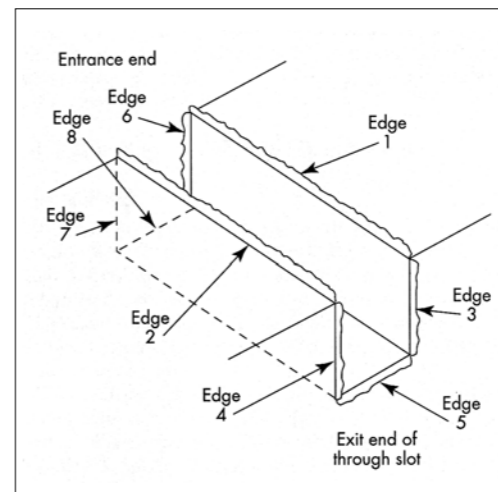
An endmilled through-slot has eight edges, each with a different burr.
